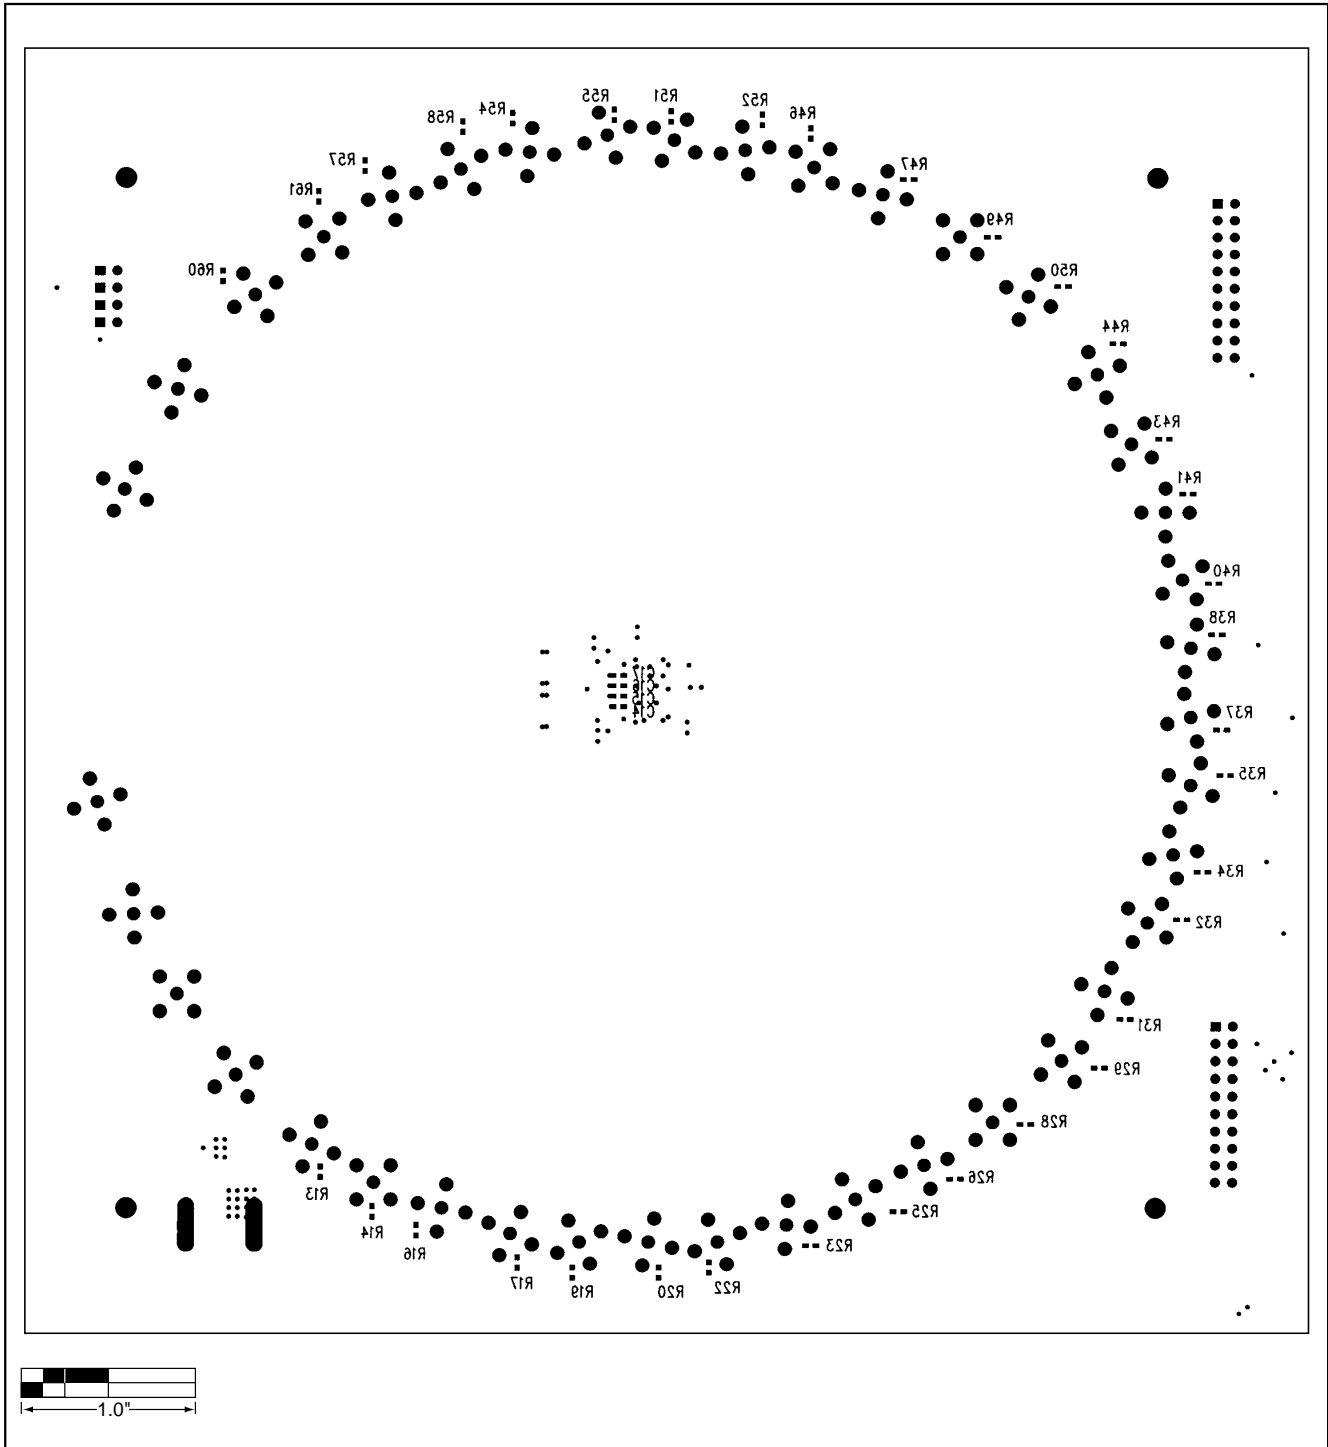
MAX3885 EV Kit Component Placement Guide—Solder Side
